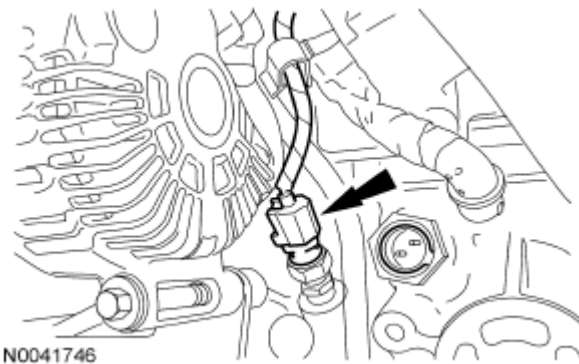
Locating Oil Pressure Sender Electrical Connector
